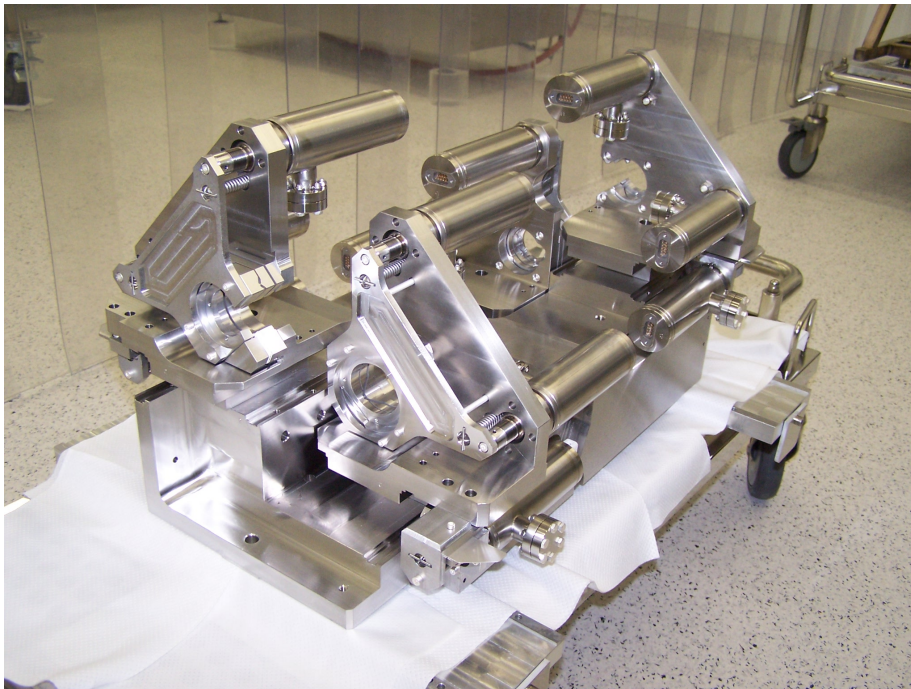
Picture of the four-mirror mounting system taken during the assembly in a clean class 10 (ISO4) room.
